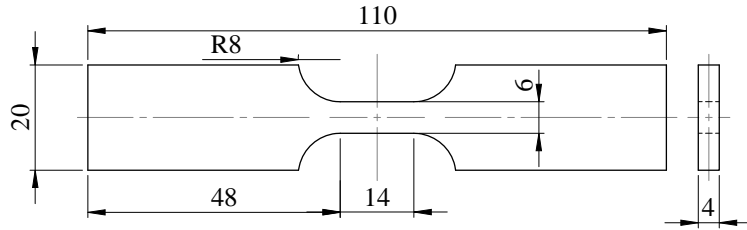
Smooth plane specimen geometry of X52 piping steel (X52_SP).
